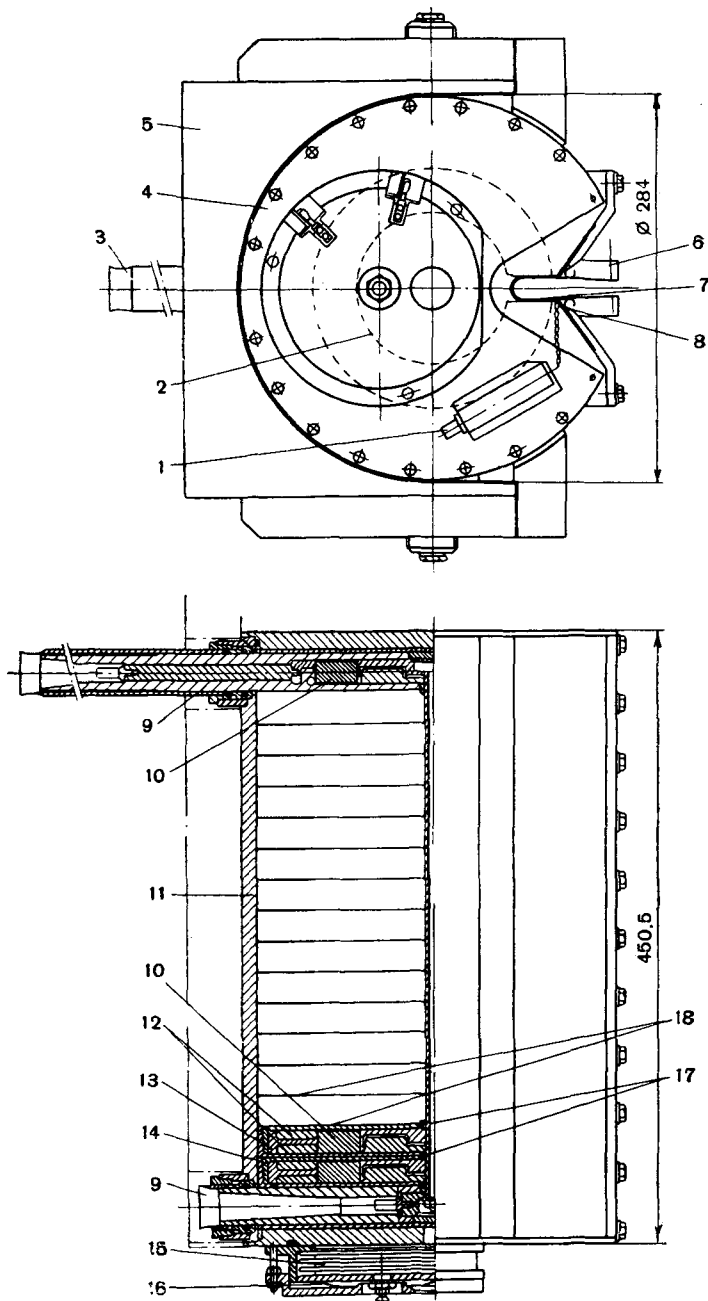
Structure of the kicker magnet. Top: View on one end of the assembled magnet. Bottom: Horizontal section of one unit: 1 — connector for coaxial measuring cable; 2 — contours of ferrite ring; 3 — connector; 4 — kicker magnet unit; 5 — supporting beam; 6 — beam «razor»; 7 — non-metallic wall in gap; 8 — coil for observation of magnet field; 9 — coaxial connector; 10 — ferrite ring; 11 — aluminium housing; 12 — aluminium cladding of ferrite rings; 13 — cast epoxy resin; 14 — polyethylene boxes; 15 — expansion bellows; 16 — spring loading; 17 — metal spacers for contact between clad ferrite rings; 18 — capacitor plates.
